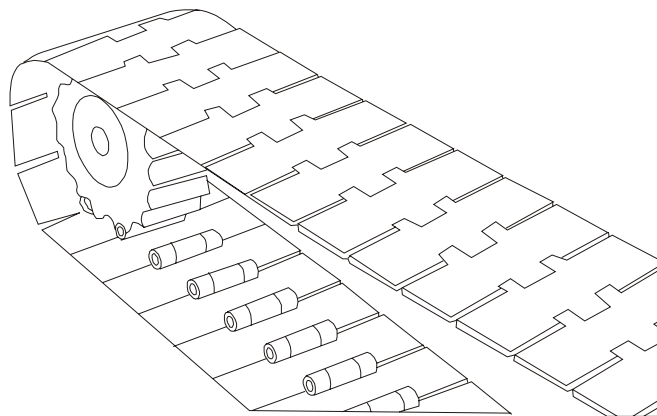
Hinged joint continuous flat-top sliding conveyor
